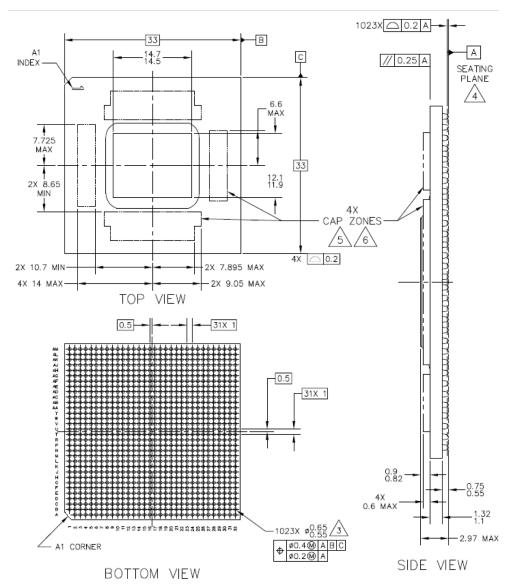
MPC8641D High-Head FC-CBGA Dimensions
